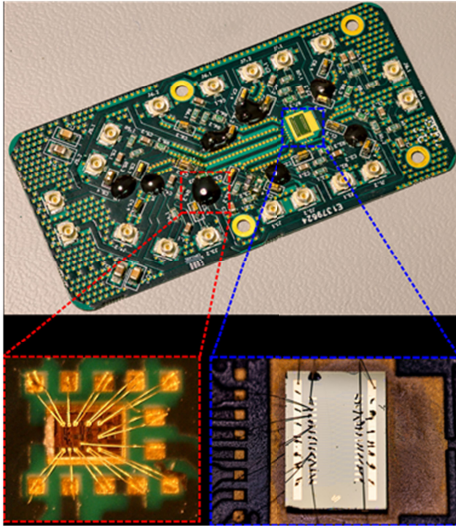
Cryogenic prototype PCB for the integration. Top: eight pixels PCB with integrated SiGe LNAs and the SNWD die. Bottom left: wire-bonded compact SiGe LNA die with double bonding to enhance stability. Bottom right: single quantum SNWD die wire-bonded to the prototype PCB.
